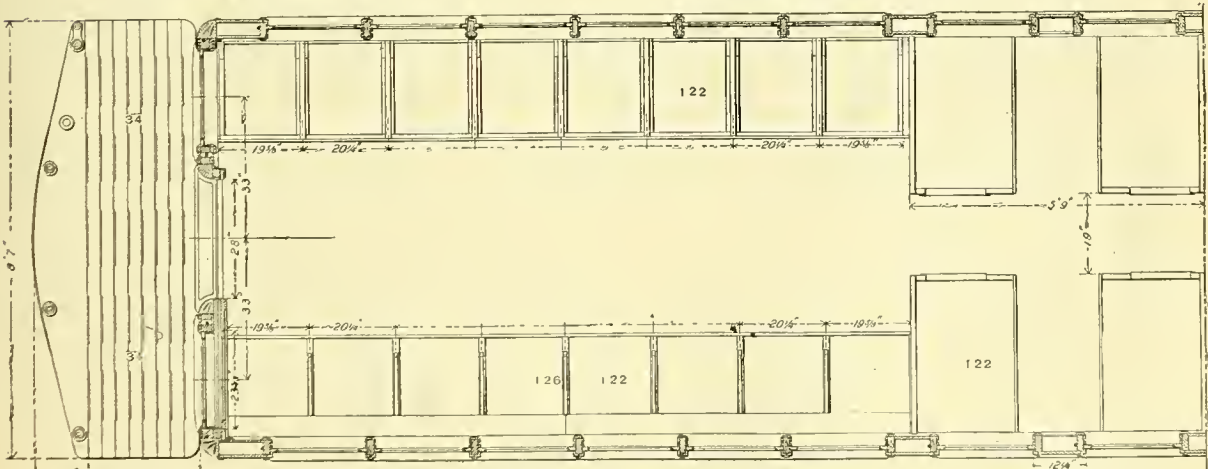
Sectional Half Plan, Showing Seats and Platform.
